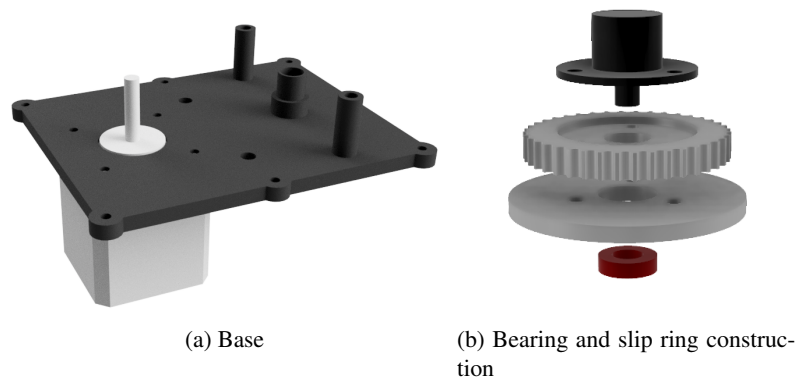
(a) Overview of the base (black) and stepper motor (grey). (b) Exploded view of the bearing and slip ring construction, from top to bottom: slip ring (black), gear part (grey), flange part (grey) and bearing (red).
